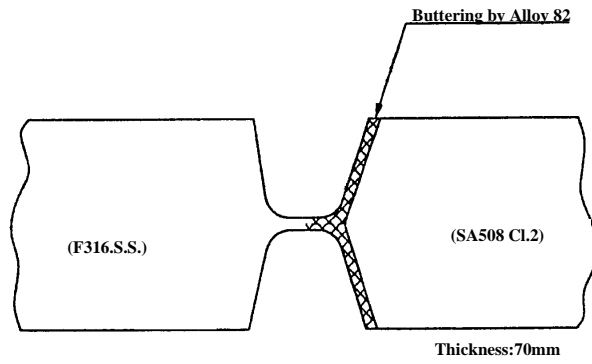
Welding joint configuration of dissimilar metal arc welding model by Alloy 132
